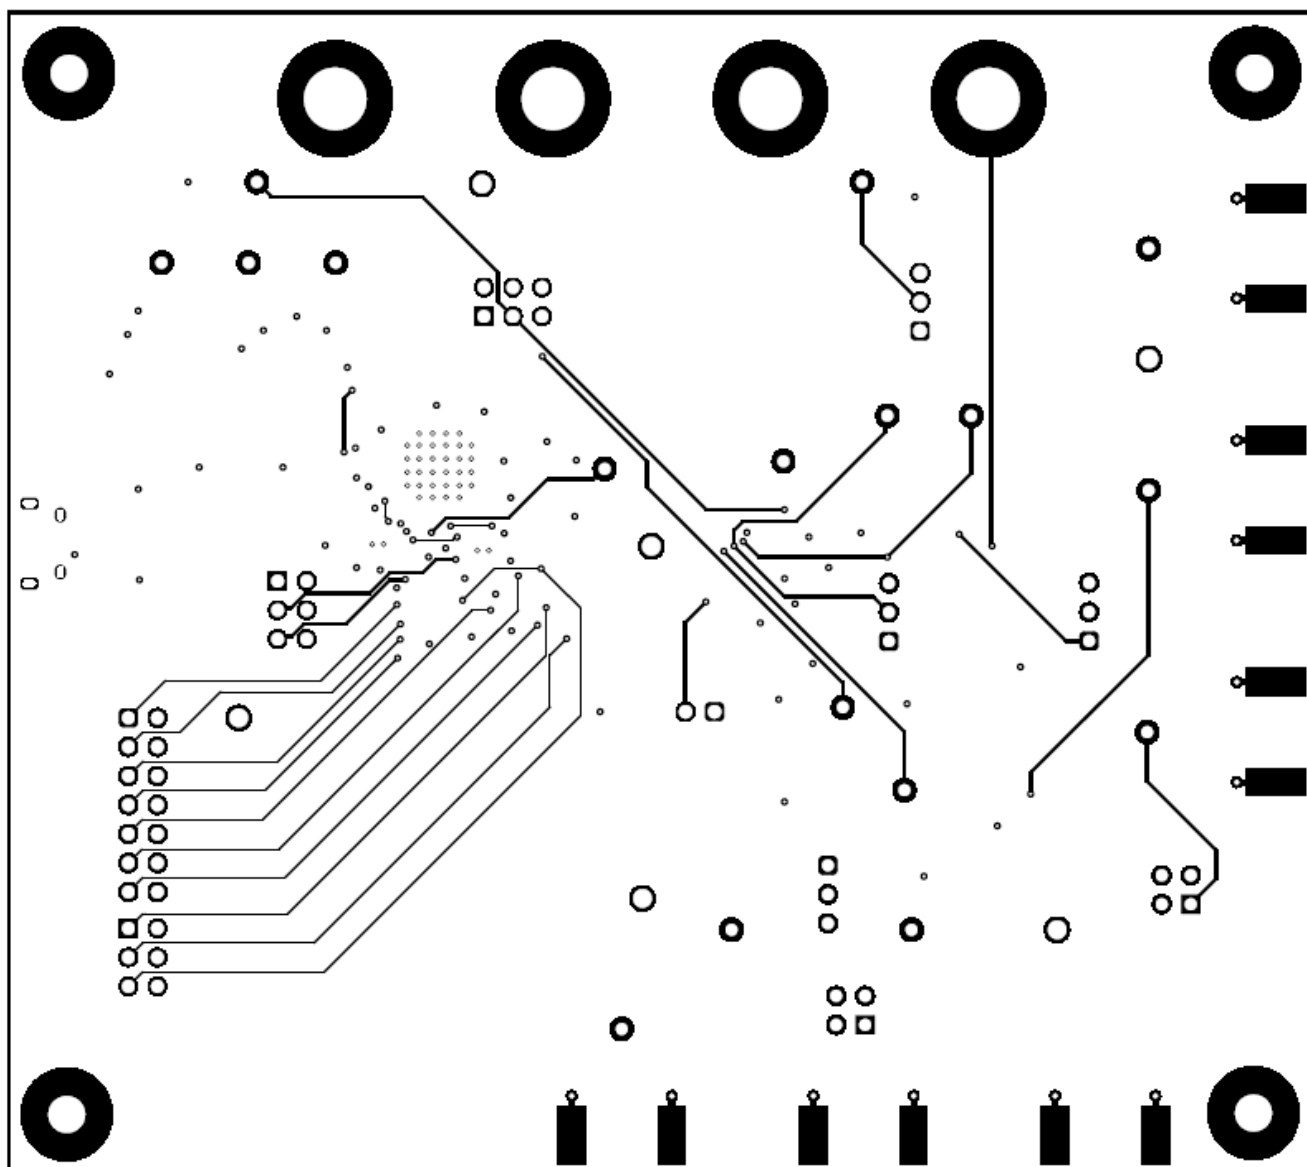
AFE881H1EVM PCB Bottom Layer Layout
